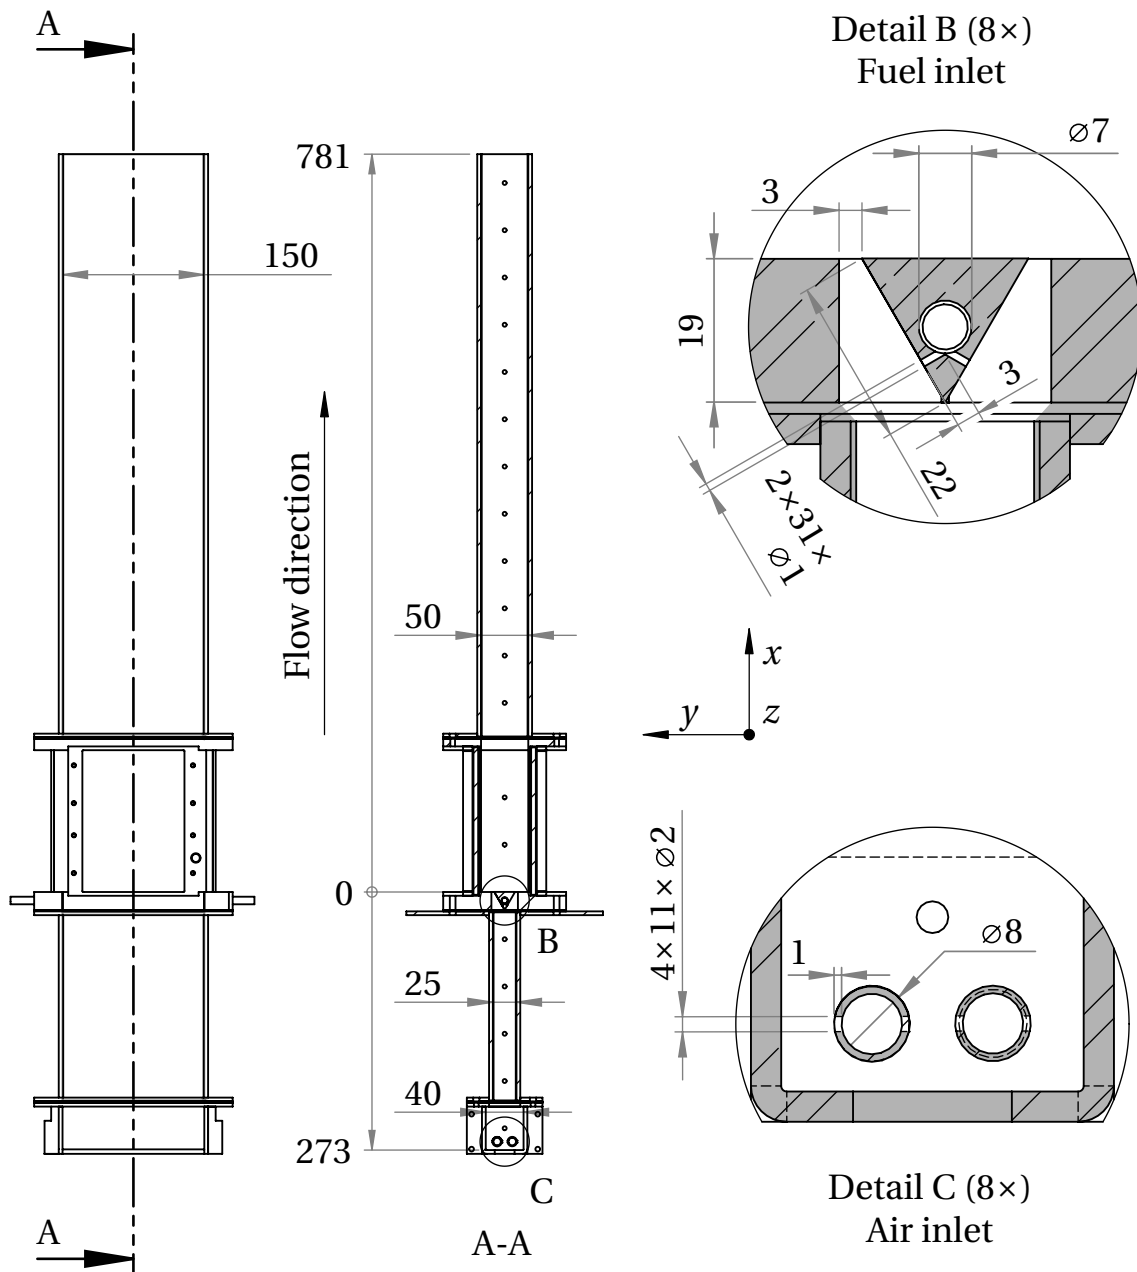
(Inner) dimensions of the Limousine test rig (in mm), with details showing fuel and air inlets.
